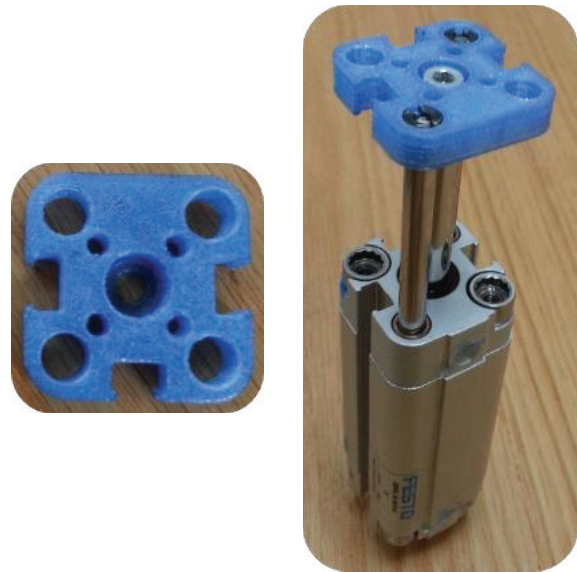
(a) 3D printed yoke plate; (b) yoke plate installed on the cylinder.
